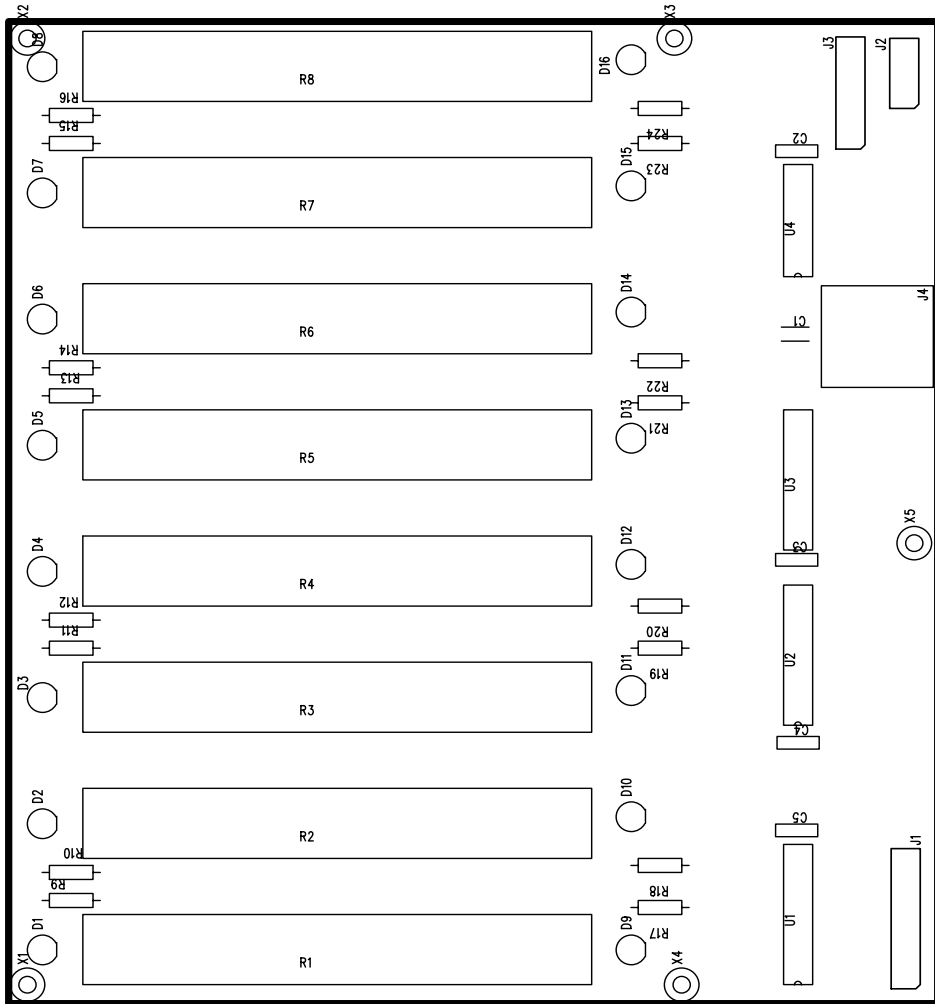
Fader module PCB, silkscreen/assembly drawing.
